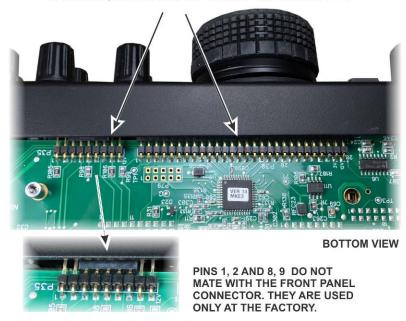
Mounting Front Panel Assembly - Connectors P30 and P35.
